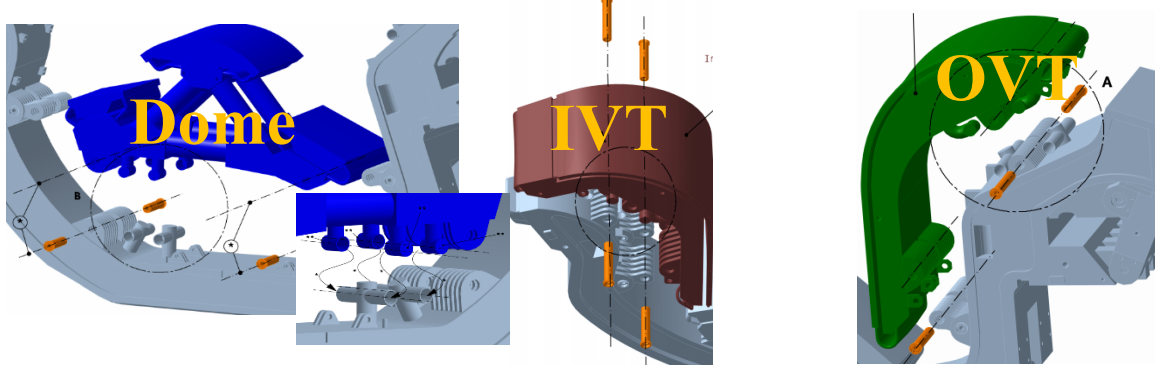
Mounting and Welding Cooling Pipes of Dome, IVT and OVT on CB
